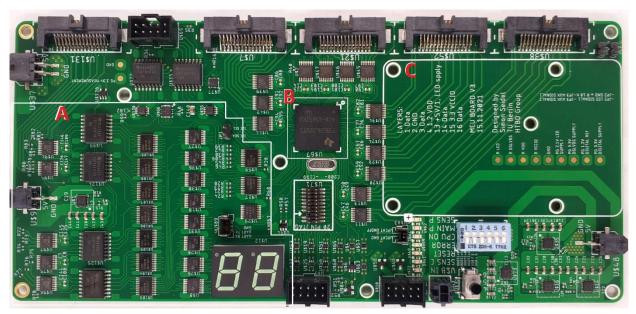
Picture of the main control PCB, partially assembled (printing and assembly as shown in the picture by PCBWay, China). A) Measuring and measurement-data transfer segment. Here we employed LVDS ICs for safe data transfer, multiplexer elements and counter ICs to store all temperature measurements in parallel B) F28386 MCU (Texas Instruments, United States). This is the core element of the design. C) Placeholder for the higher-level communication PCB.
